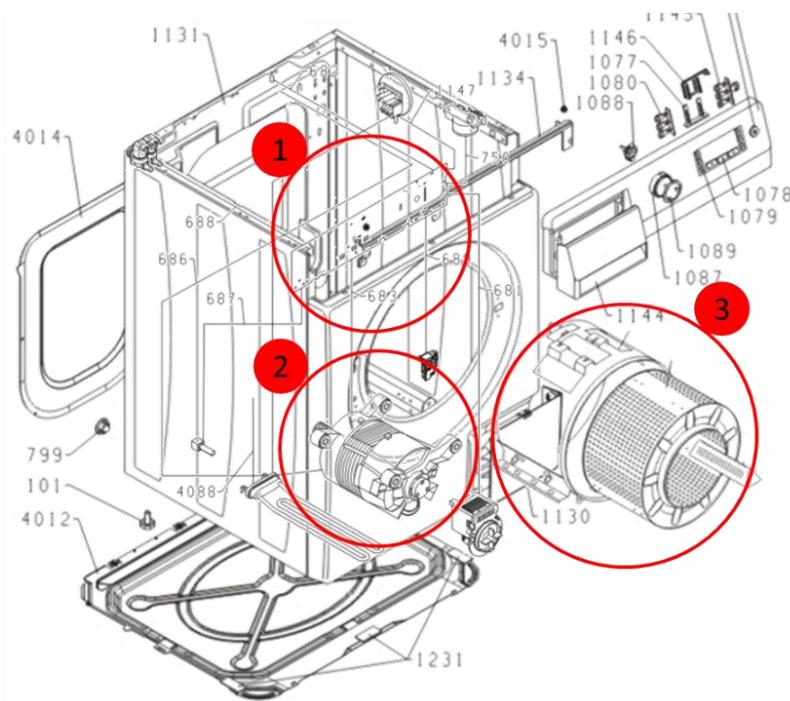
Target components for a generic washing machine: 1) Control Unit; 2) Main Motor; 3) Inner Tube (Source: www.how-to-repair.com)
